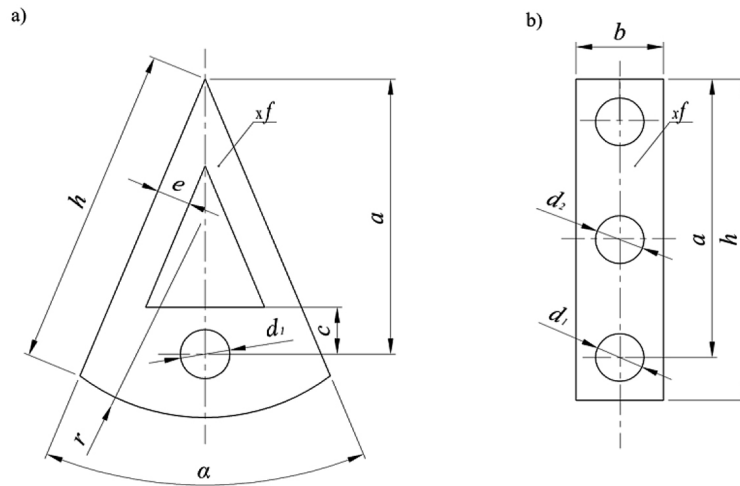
Geometric features of hammers: a) a hammer in the shape of a circular result $\varphi = 45^\circ$, b) rectangular hammer $\varphi = 0^\circ$
